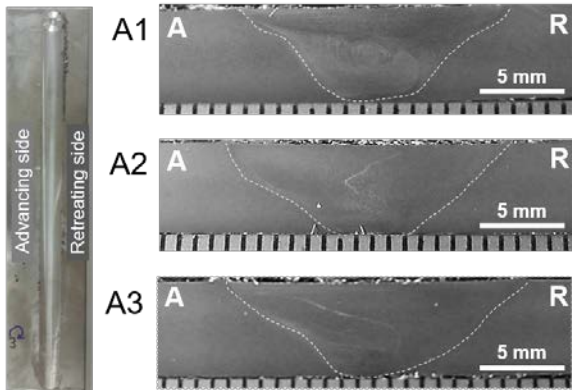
Macrographs show cross section of welded samples. A: Advanced side. R: Retreated side. Source: The authors.
